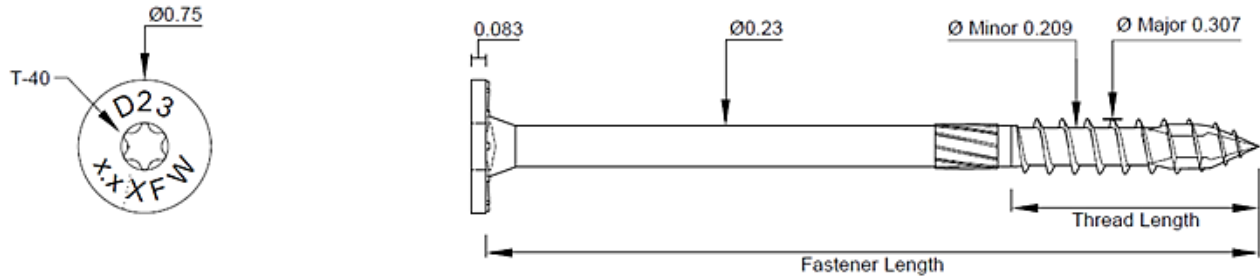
Starborn® Structural F23-W Screw (Dimensions in Inches)
